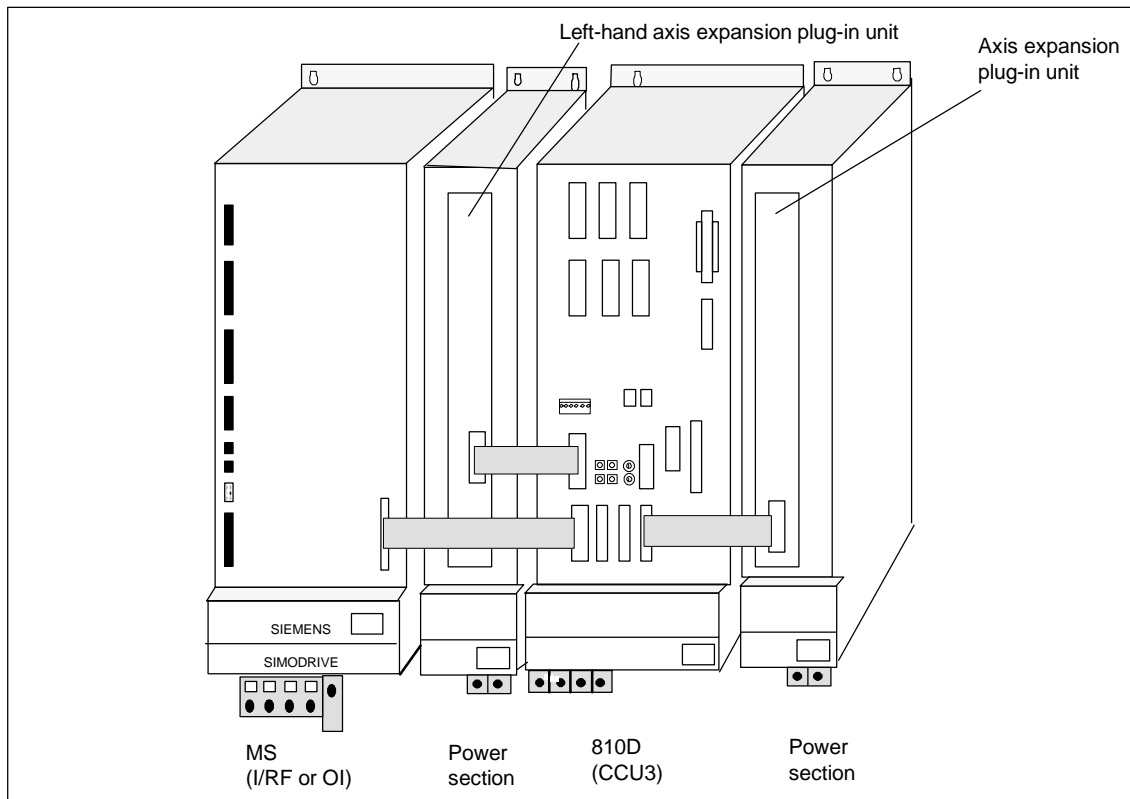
Axis expansion with SIMODRIVE 611 single-axis power module with left-hand axis expansion plug-in unit and axis expansion plug-in unit
